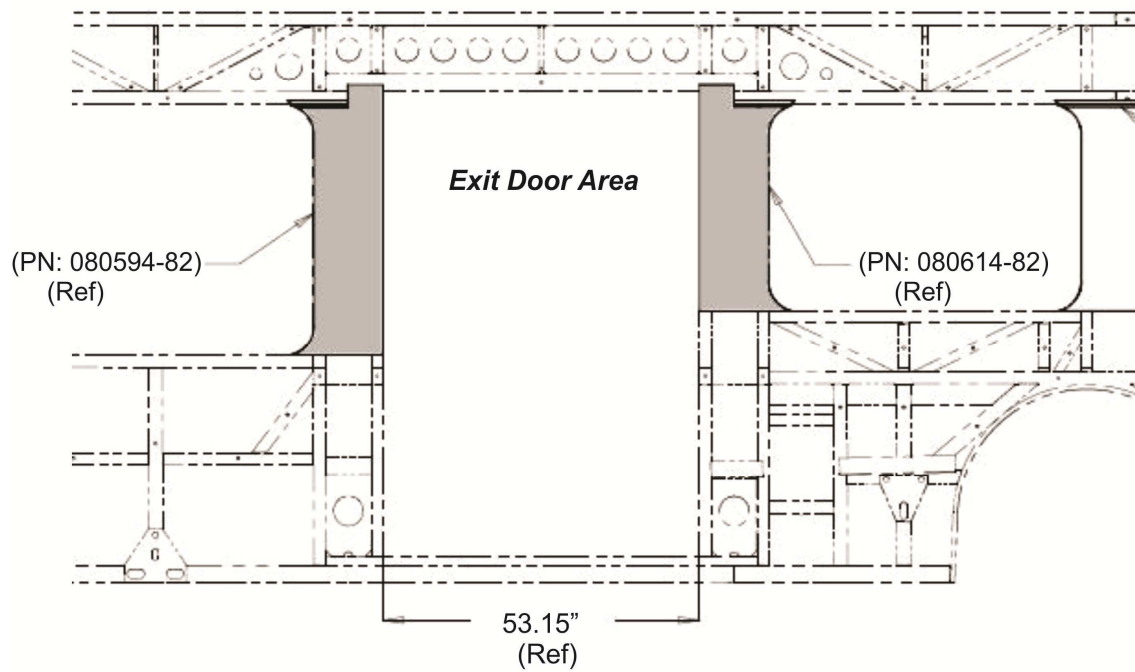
A: SHOWN COMPLETED VIEW OF CORNER GUSSET PLATES WELDED IN PLACE.
